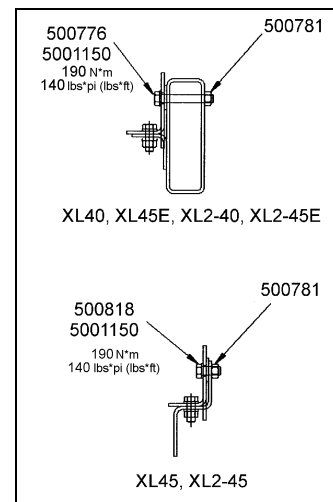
ENGINE CRADLE HORIZONTAL BOLTS
